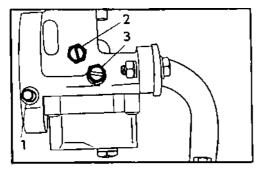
Carburettor 1 — Choke push button, 2 — Throttle stop screw, 3 — Fast-idling screw
